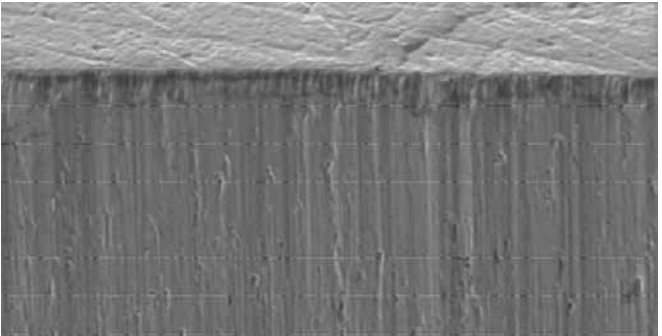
Typical tool wear of an uncoated blanking edge after 100 000 parts produced in Docol 1400 M.
